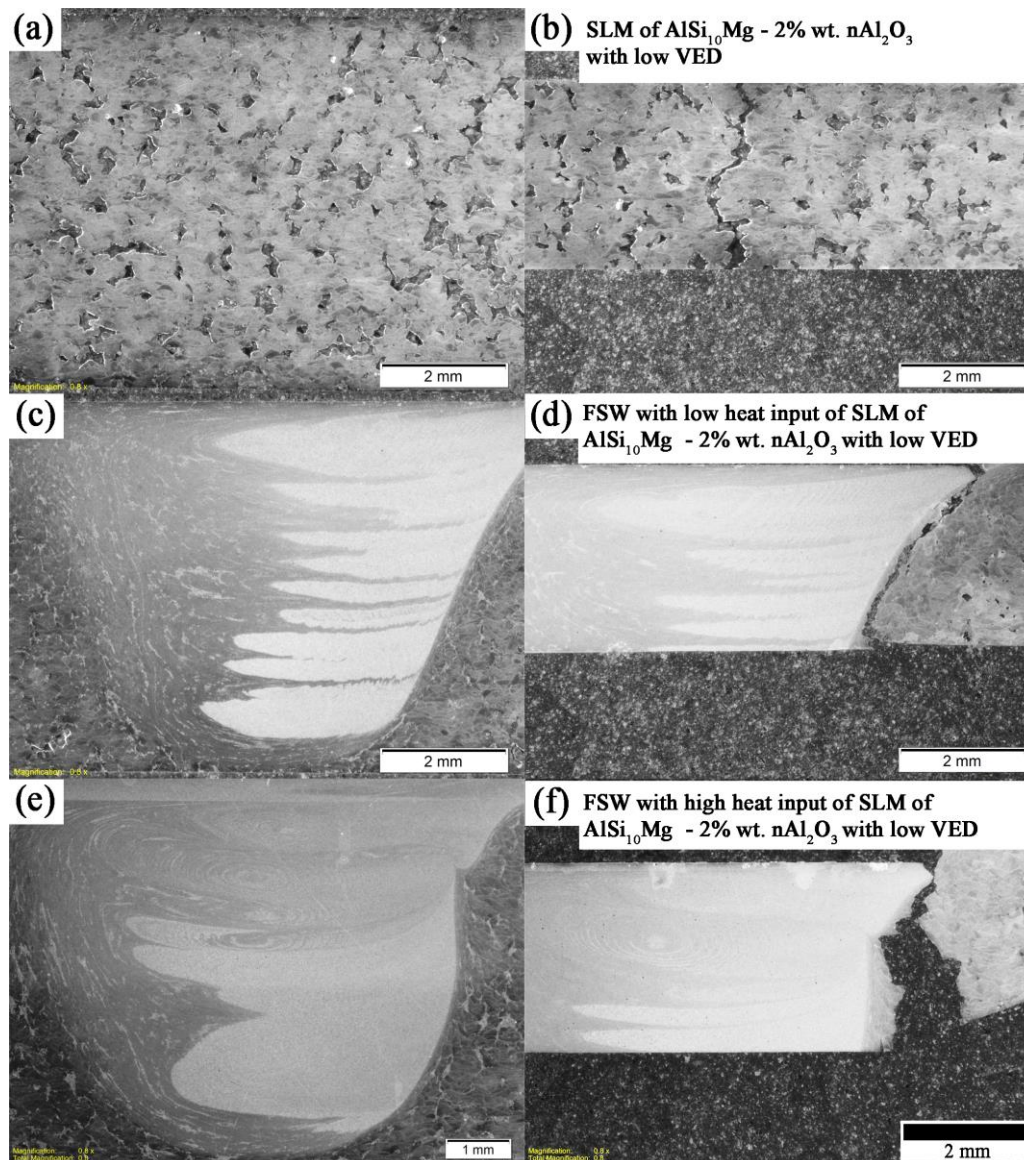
Cross-sectional view of the samples before (left) and after the tensile test (right).
